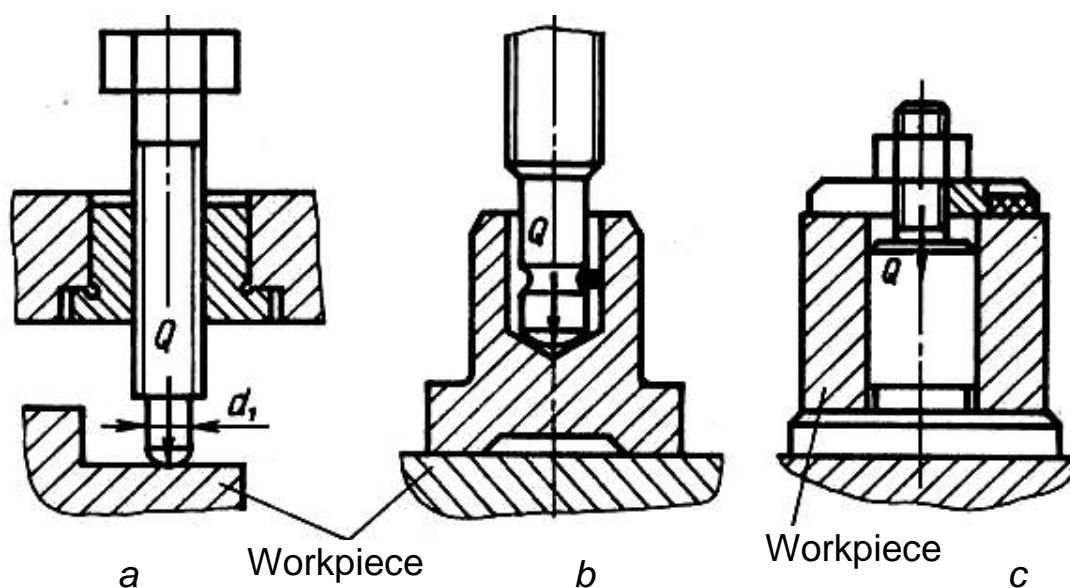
Diagrams of screw clamps: *a* – clamping by a bolt butt; *b* – clamp with a rest plate; *c* – clamping by a nut with quick-detachable washer
